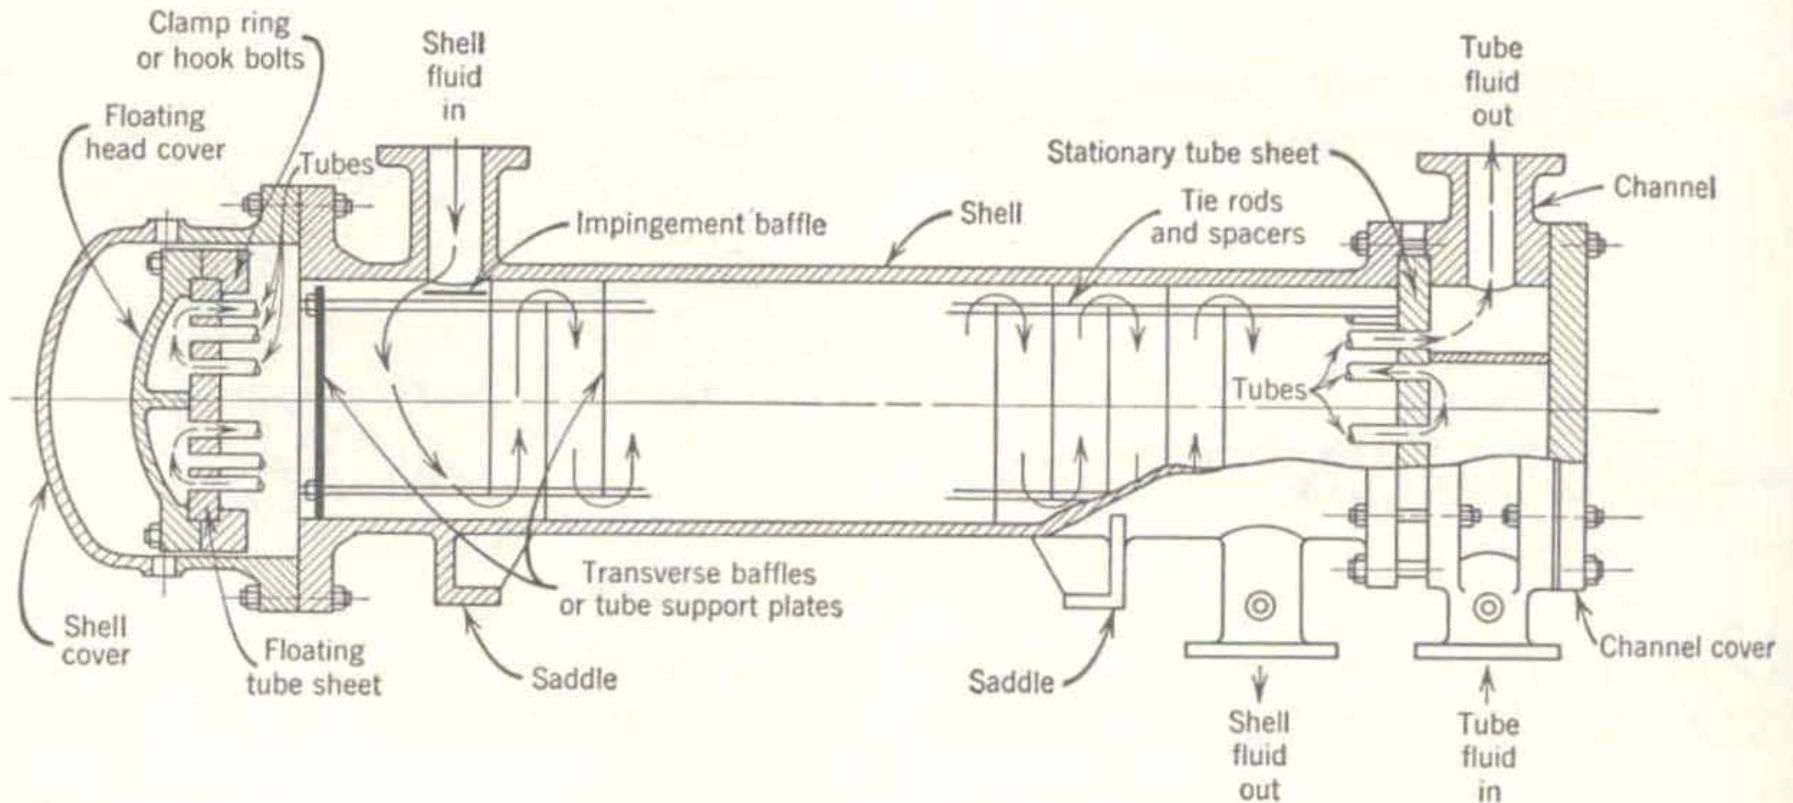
Cross-sectional drawing of a typical four-pass tube side, single-pass shell side, floating head heat exchanger. (*Tubular Exchanger Manufacturers Association.*)
